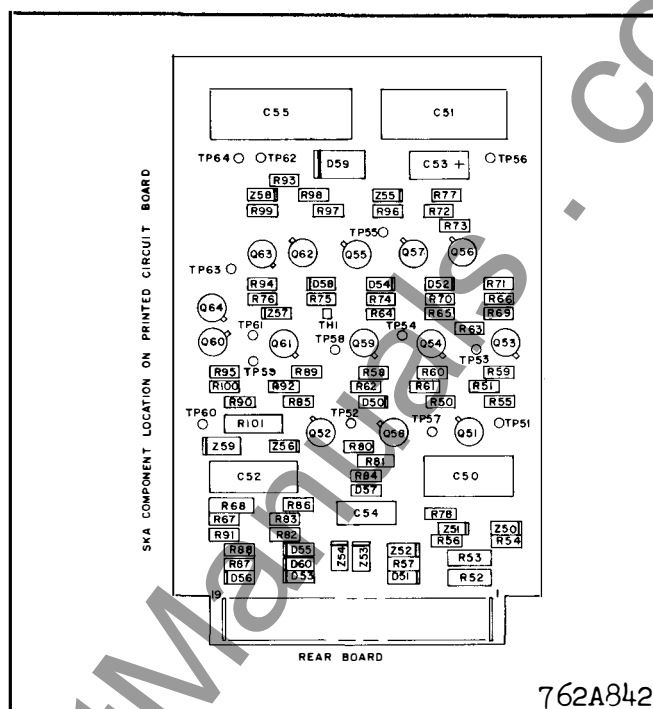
Component Location for the Rear Printed Circuit Board of the Type SKA Relay.
